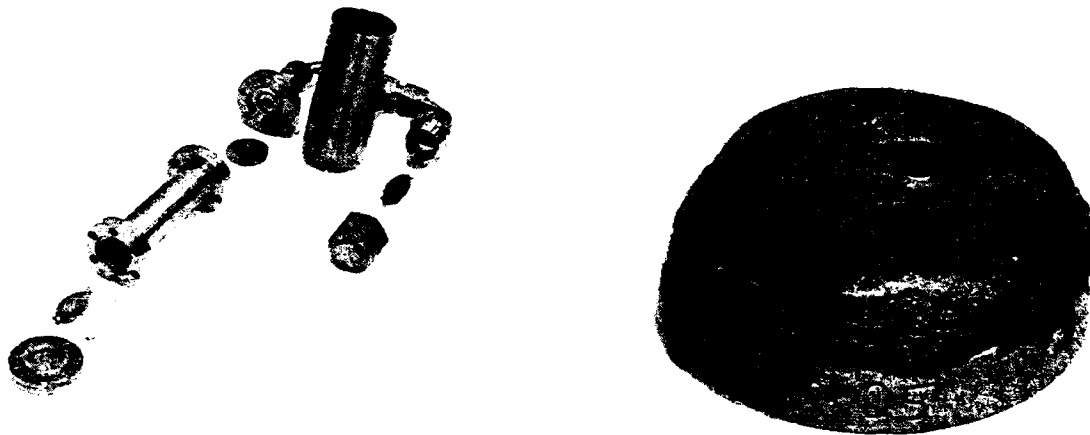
The subassembly parts are shown on the left, and the encapsulated sensor subassembly ready for pad mounting is shown on the right.
